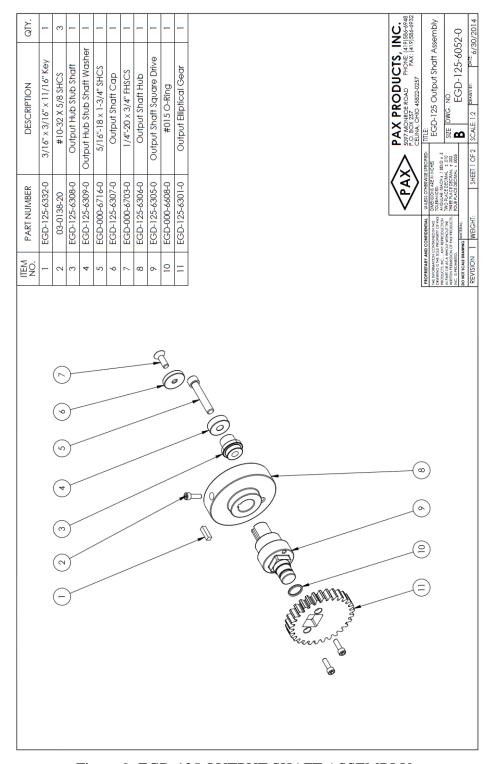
EGD-125 OUTPUT SHAFT ASSEMBLY
